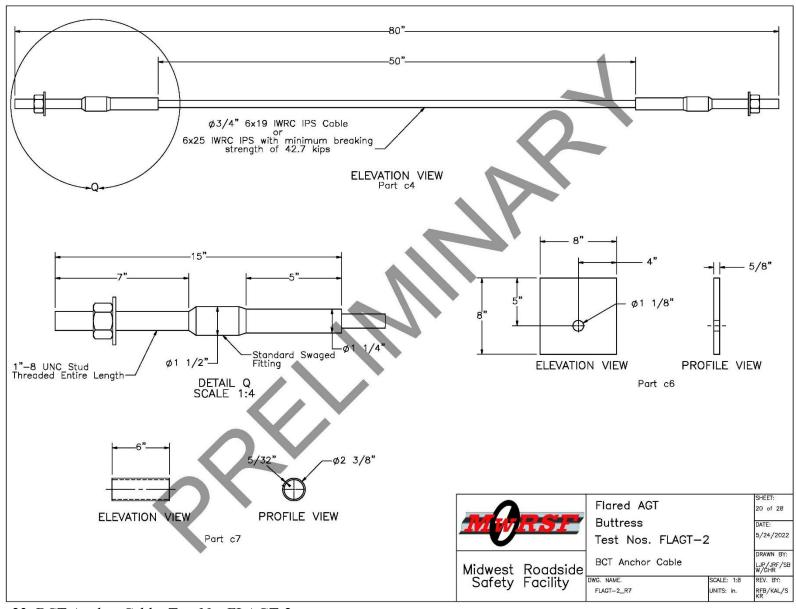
BCT Anchor Cable, Test No. FLAGT-2
